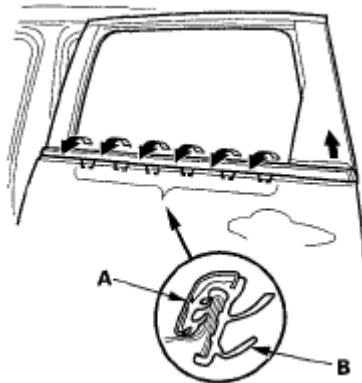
Identifying Door Glass Outer Weatherstrip And Inner Molding
